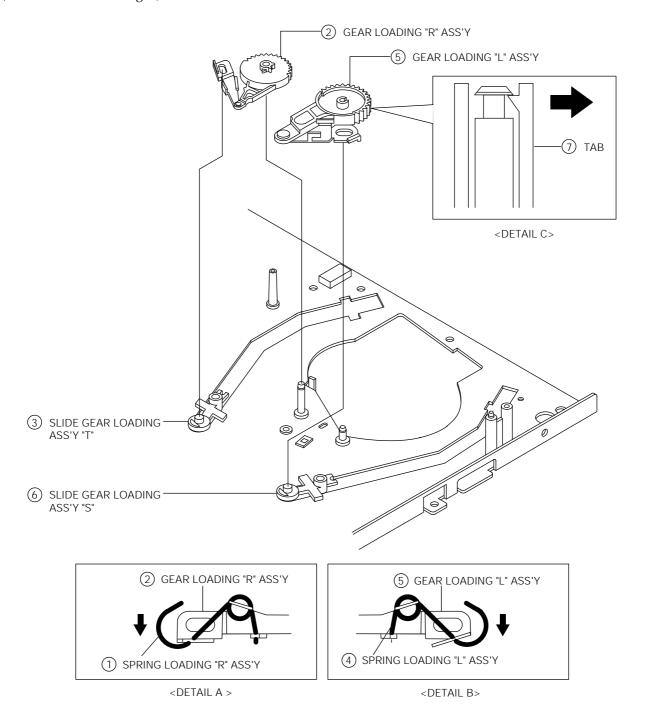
Gear Loading "L", "R" Ass'y Removal
